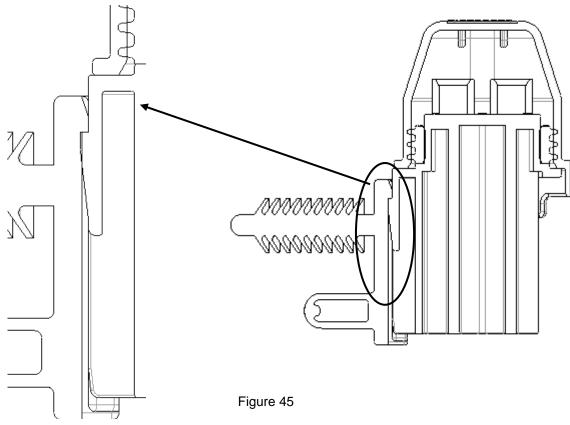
shows the engaged position of mounting clip to the raised bump in the housing.
